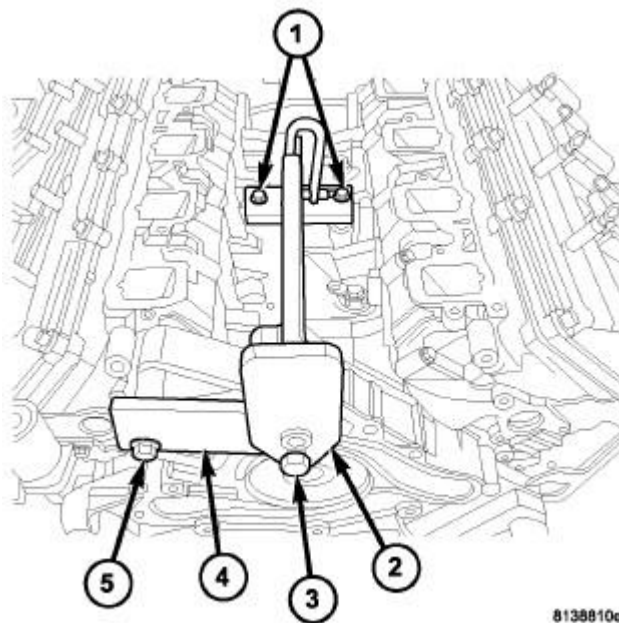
ENGINE LIFT FIXTURE and ADAPTER
